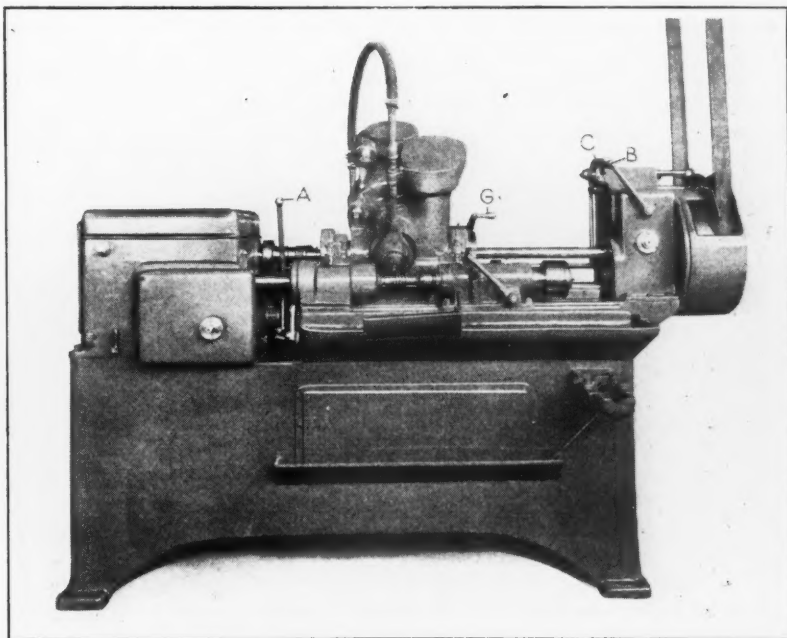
Fellows Improved Thread Generator with Quick-return Mechanism
